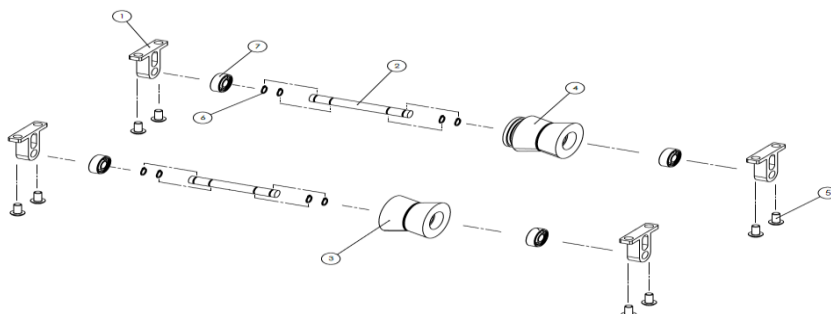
Scheme of wheels subassembly in exploded view. 1: wheel supports; 2: spindles; 3: normal wheel; 4: wheel to couple with encoder; 5: screws to fix the wheel supports; 6: retention rings; 7: roller bearings.
